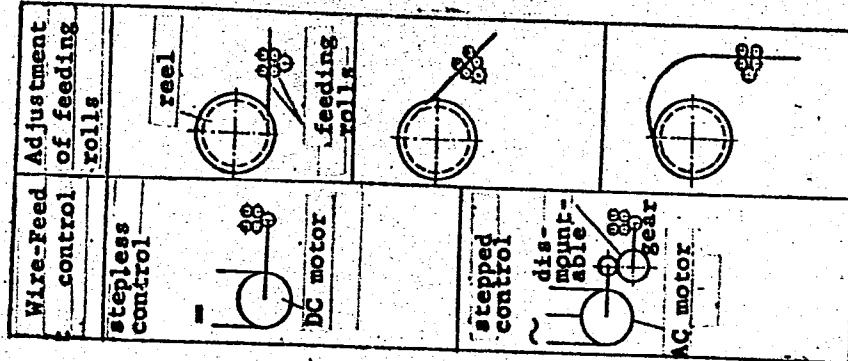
, c. Variants of accessories for TeNIITMASH-designed standardized semiautomatic welding machines
